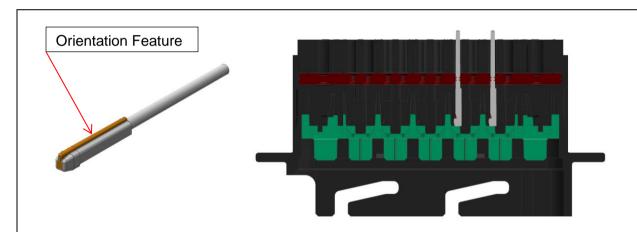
(Left) Shows Blind cavity plug, (Right) Shows cross section of male assembly with blind cavity plugs inserted fully
